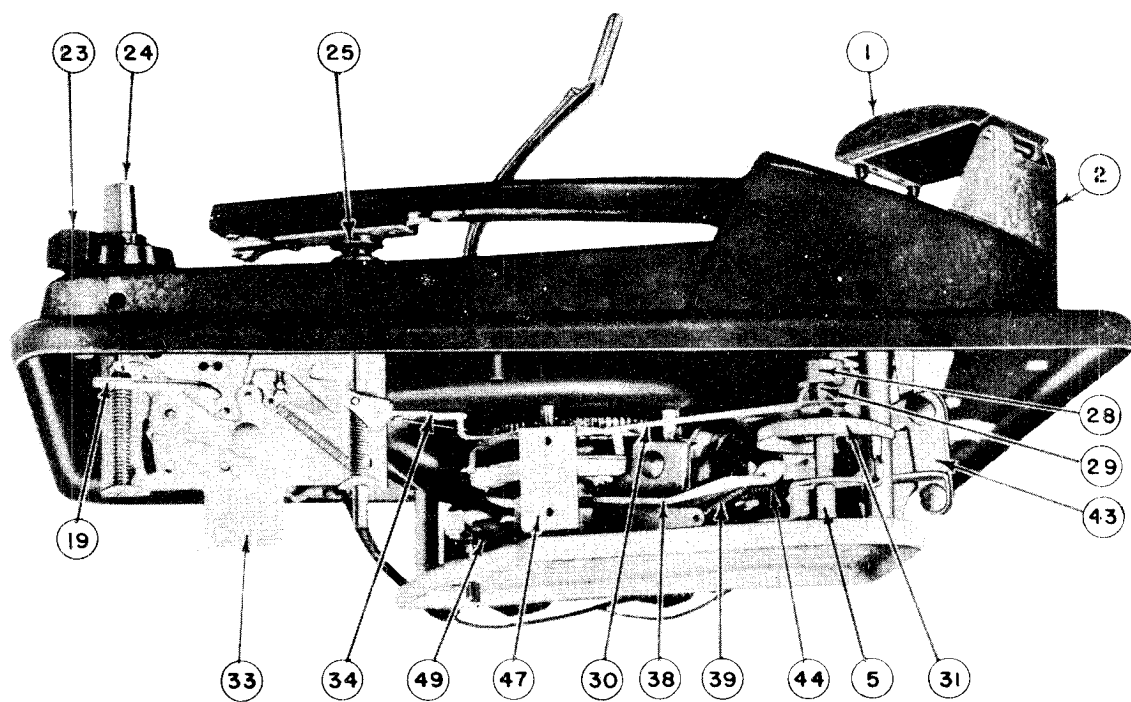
PARTS LOCATION -- RIGHT SIDE VIEW
